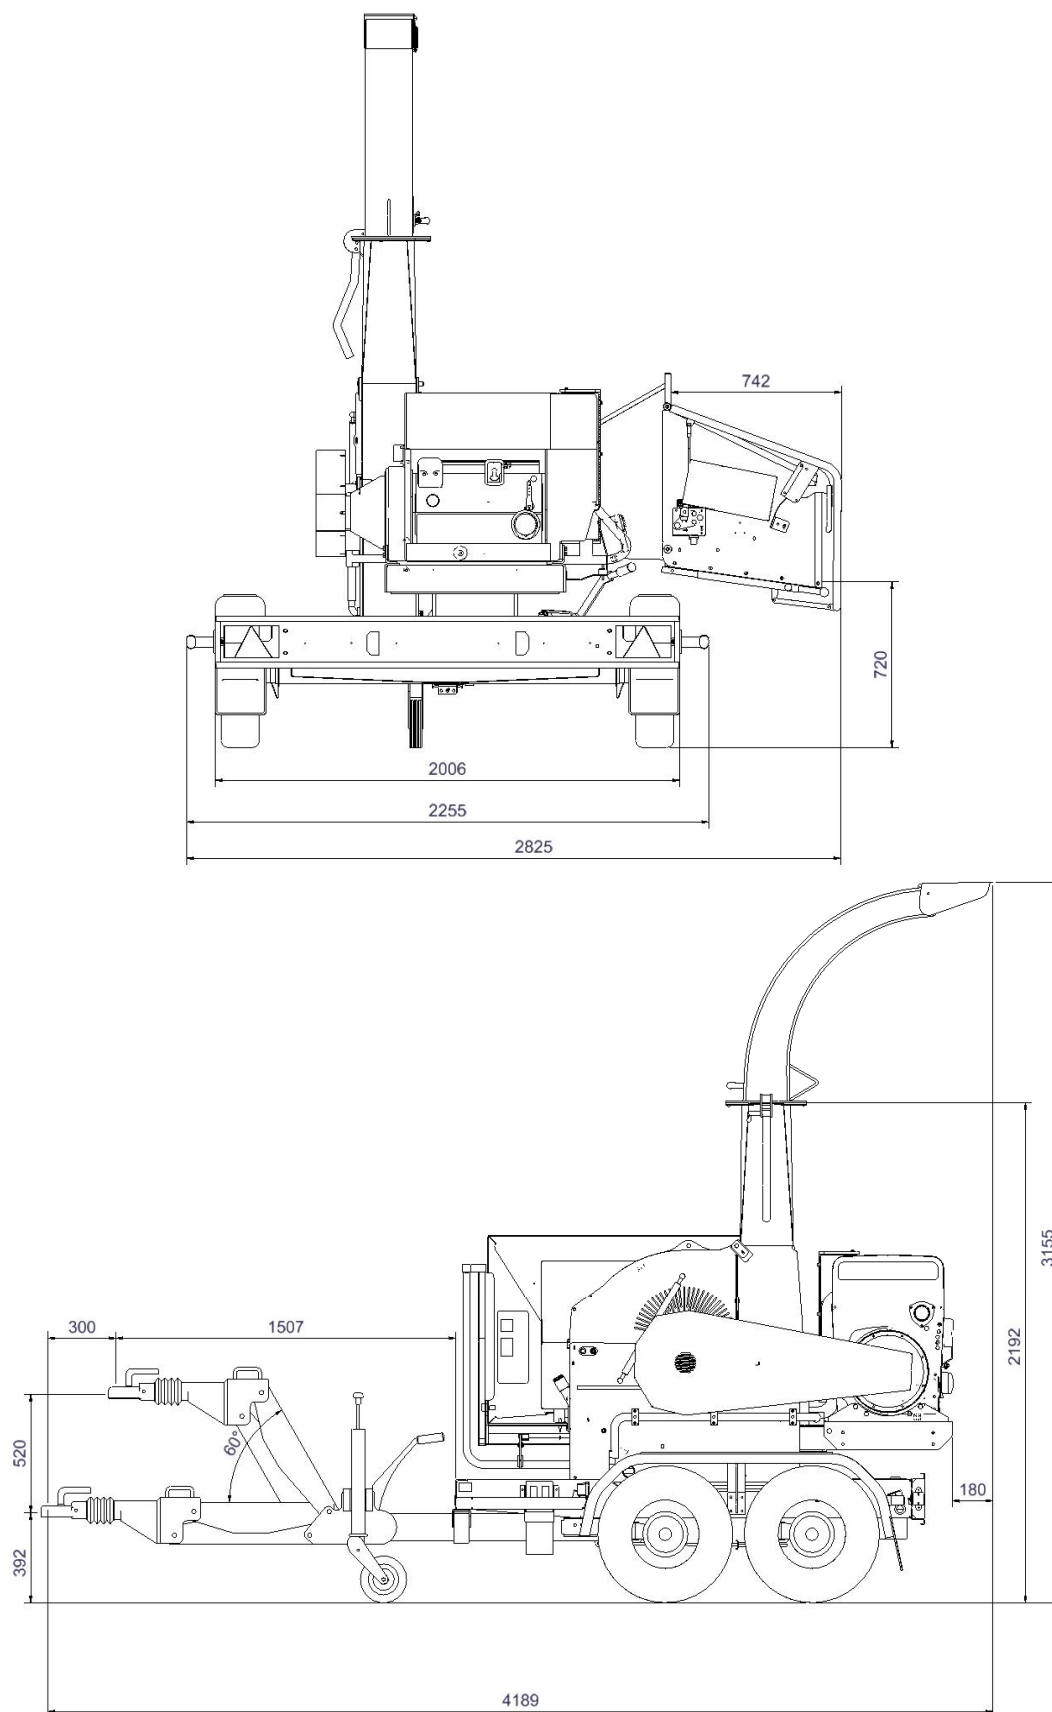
Dimensional drawing for TP 250 MOBILE TURNTABLE
